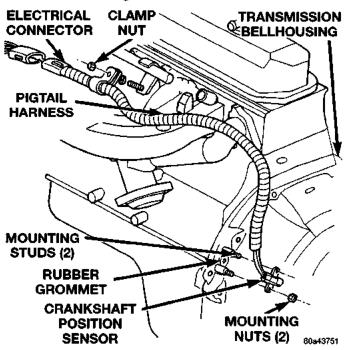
Crankshaft Position Sensor—2.5L 4-Cyl. Engine—Auto. Trans.
